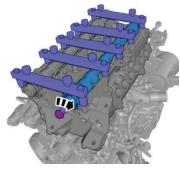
A: Volvo Service Info graphic shows the tool jig installed, and also indicates proper clockwise (ONLY!) rotation of camshaft.
